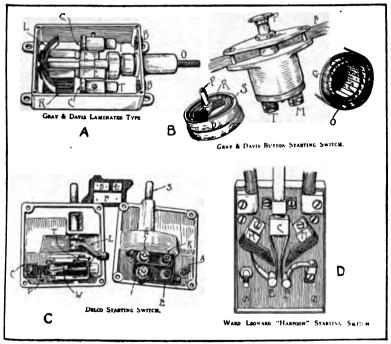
Showing Construction of Typical Motor Starting Switches.
